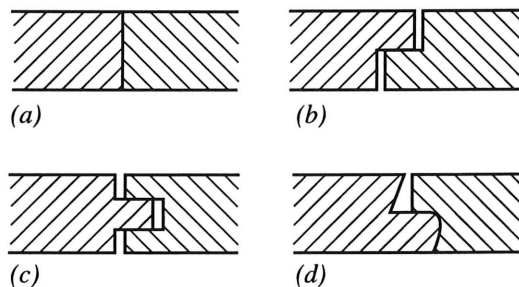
Types of joints. (a) Butt joint, (b) half lap joint, (c) tongue and groove joint, (d) special joint.
